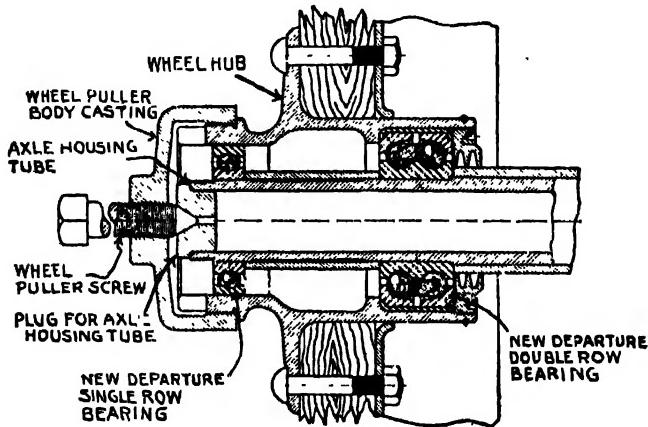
Showing Construction of Simple Wheel Puller for Removing Wheel Hub From Full Floating Rear Axle.
